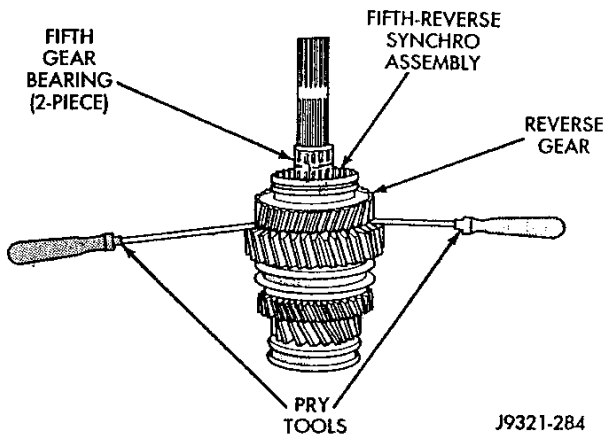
Reverse Gear And Fifth-Reverse Synchro Removal
